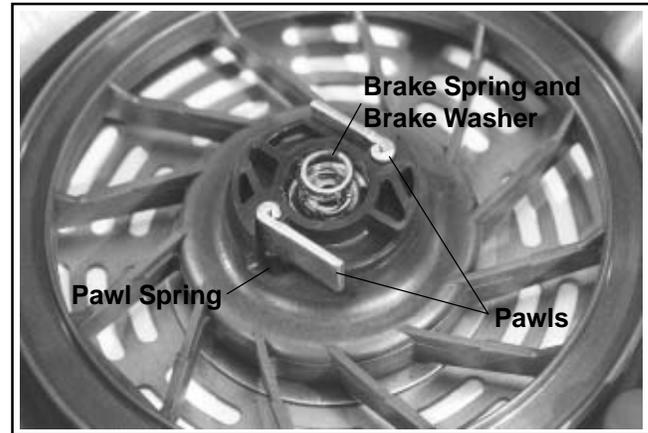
Brake Spring and Washer, Pawls, and Pawl Springs.
